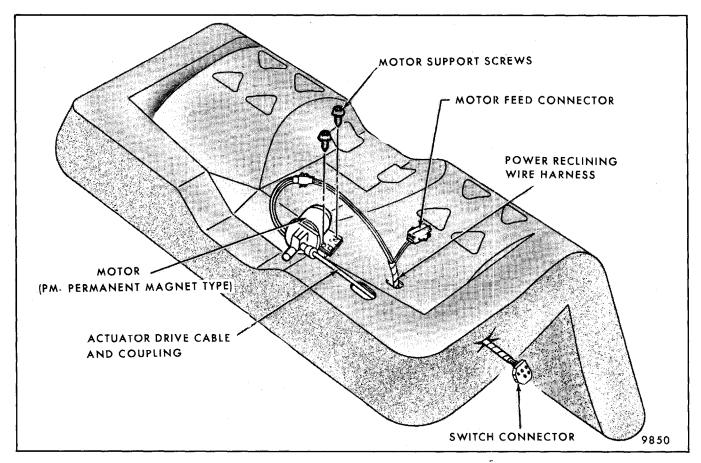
B and C Style Power-Operated Reclining Seat Back Motor, Drive Cable and Wire Harness - Split Back Full Width Seat
